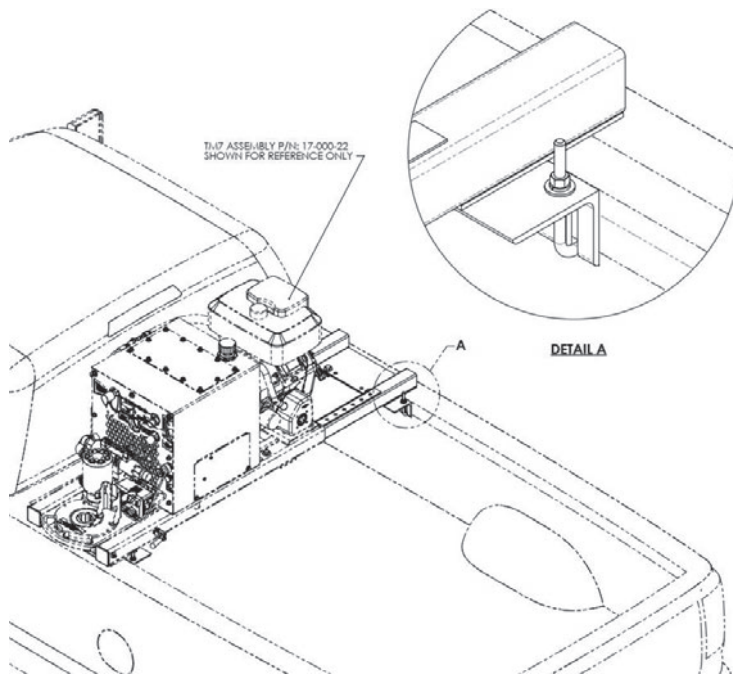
The drawing illustrates top-mounted installation of the TM-7 on a pickup bed.
